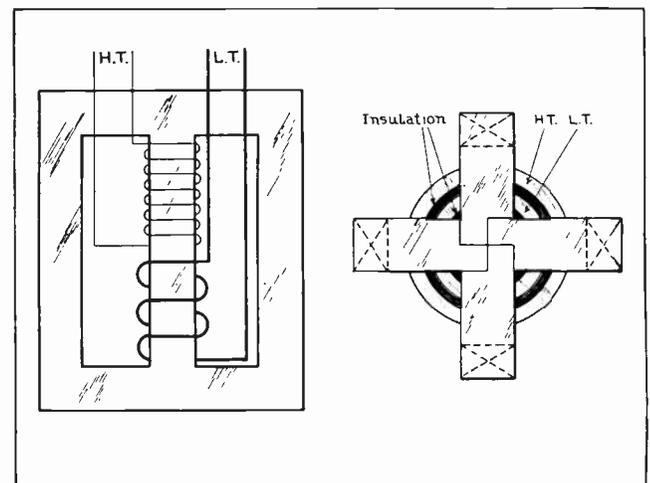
The diagram on the left shows a transformer with a shell-type core, and on the right is shown the top view of a transformer with a distributed-type core. This view shows the top edges of the coils and insulation, while the sketch on the left shows a schematic diagram of the coils in their position on the core.
